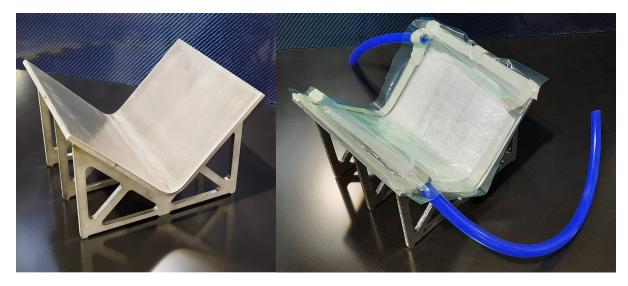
The steel L-shape mould used to manufacture the composite specimens before (left) and after the bagging process has been completed (right).
